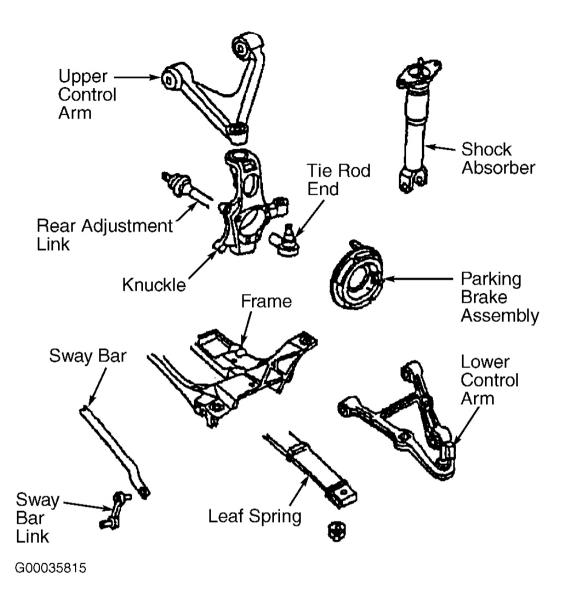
Exploded View Of Rear Suspension Courtesy of GENERAL MOTORS CORP.
